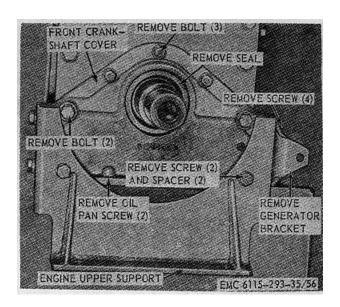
Engine upper support and front crankshaft cover, removal and installation.
